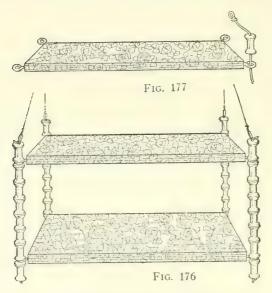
Spool Book-shelves Fig. 177. — Detail of Shelves
